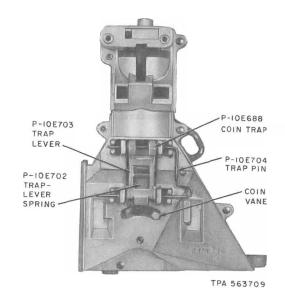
hTrap-Lever Spring and Trap-Lever Assembly
